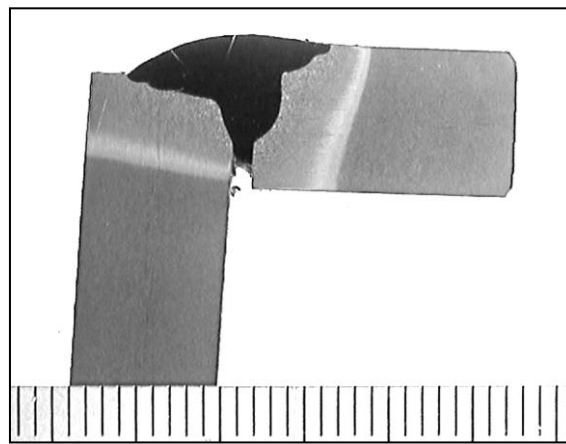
Macrograph of the weld cross-section produced with parameters detailed in Table 3-11 - Test 9. Note: Scale is in millimetres.
